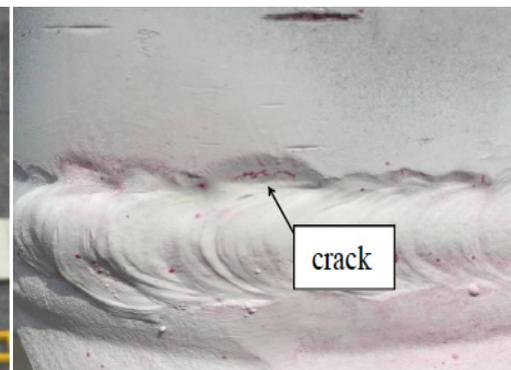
The crack at the fusion line on the aluminum pipe of the weld
